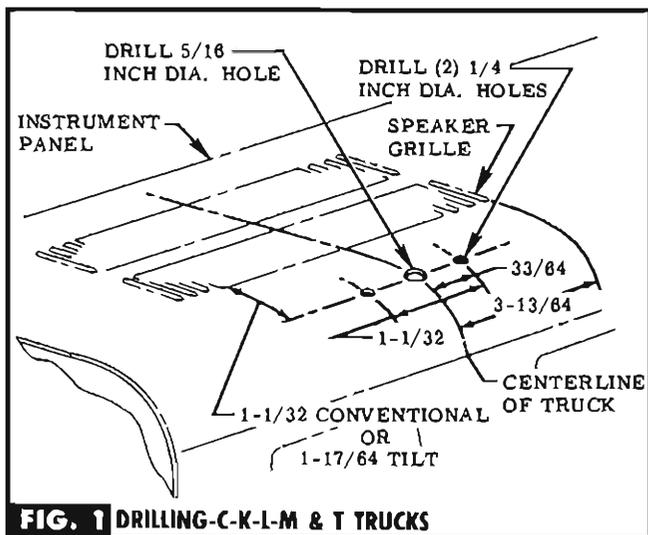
DRILLING-C-K-L-M & T TRUCKS
